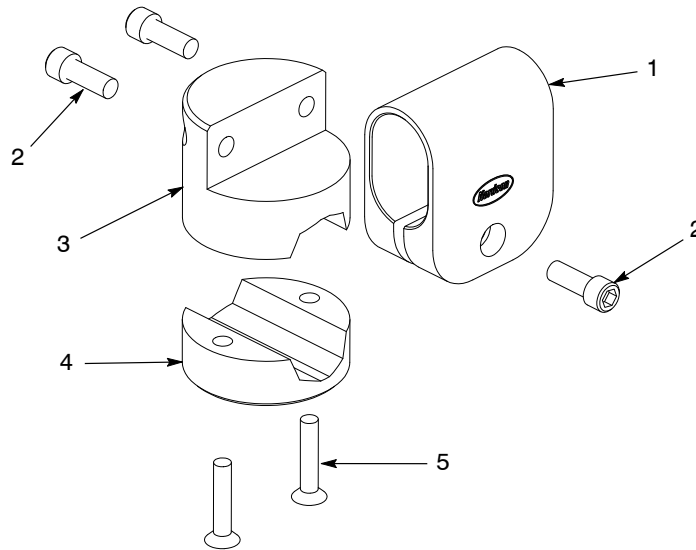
Horizontal Bar Gun Mount for Sure Coat/Encore Tube-Mount Guns
